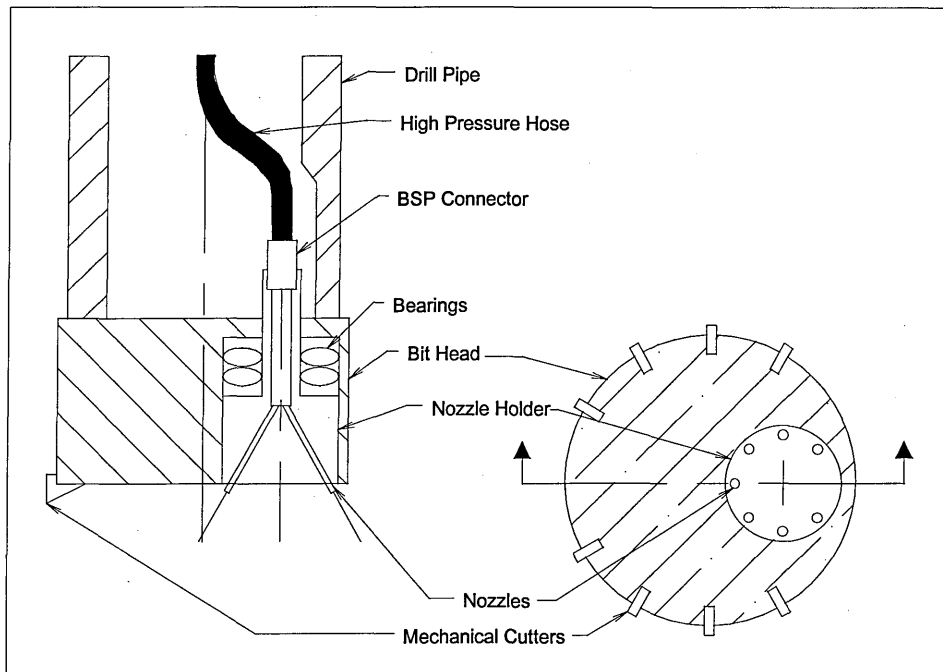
THE ROGALAND ABRASIVE DRILLING HEAD
